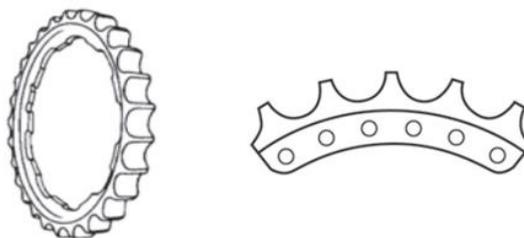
Solid Sprocket (Left) and a Segmented Sprocket Section (Right)
